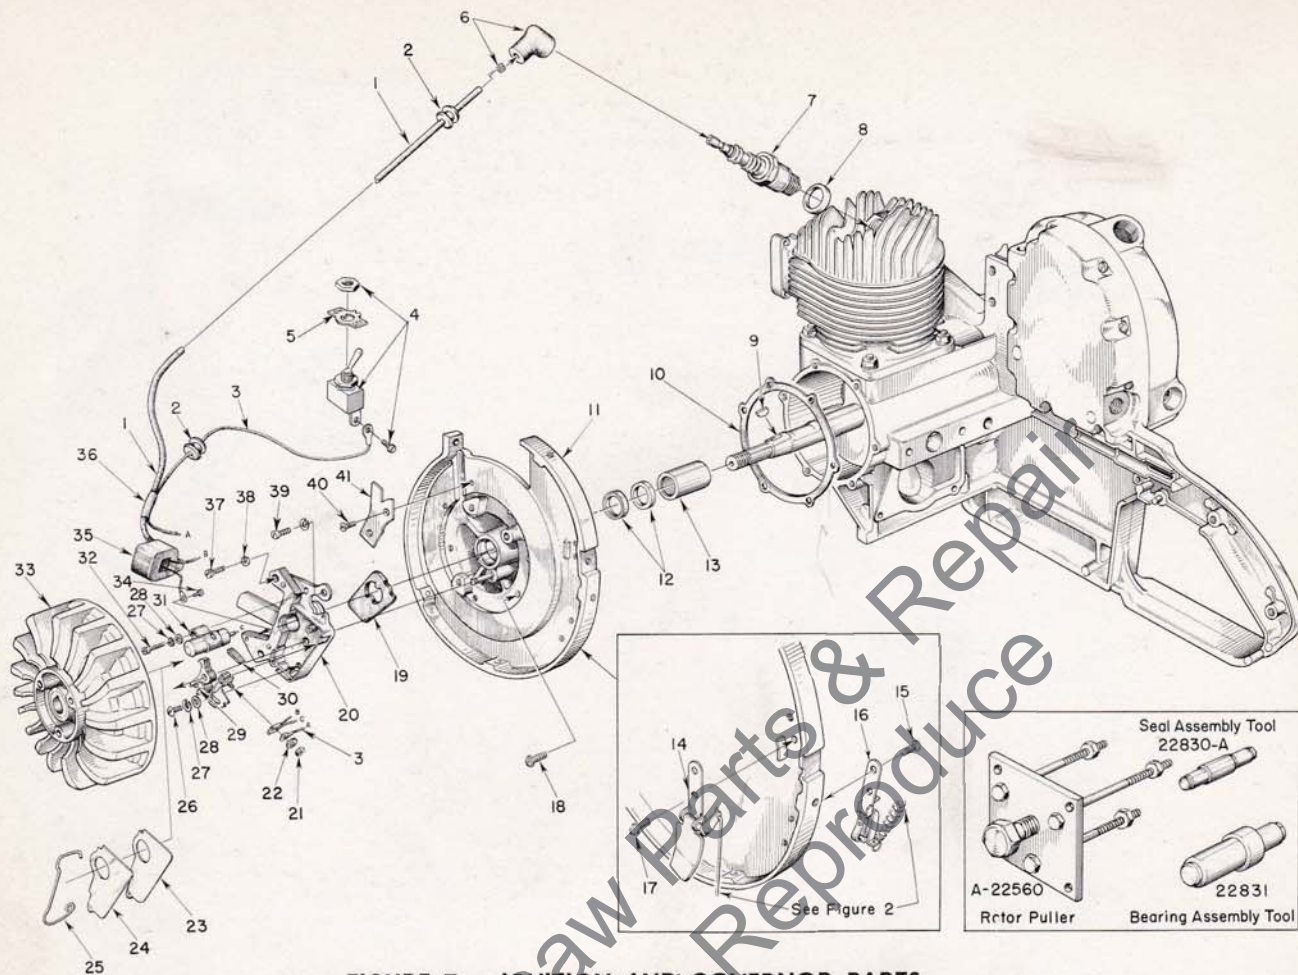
IGNITION AND GOVERNOR PARTS
